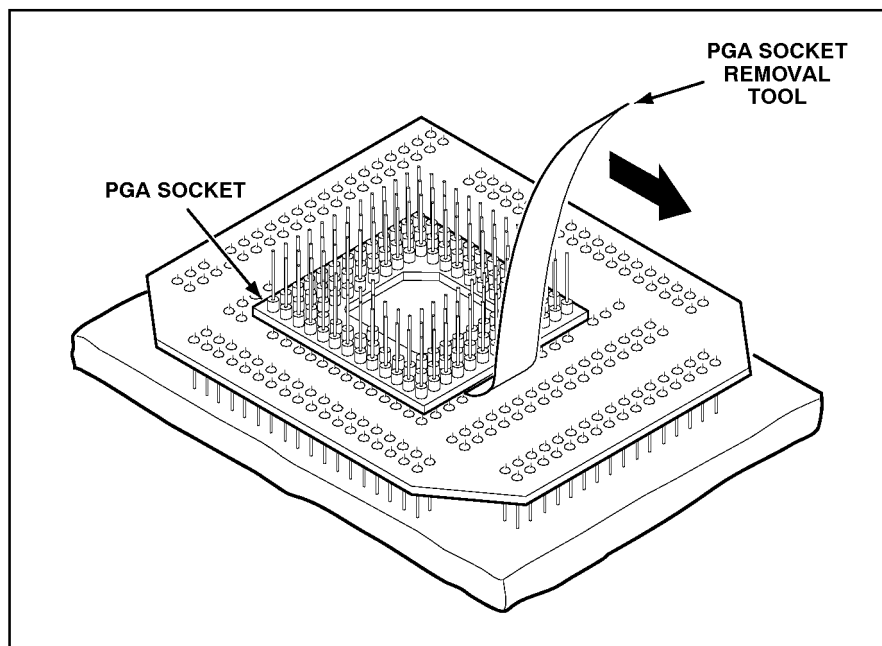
Removing a protective socket from a typical PGA probe adapter board.
